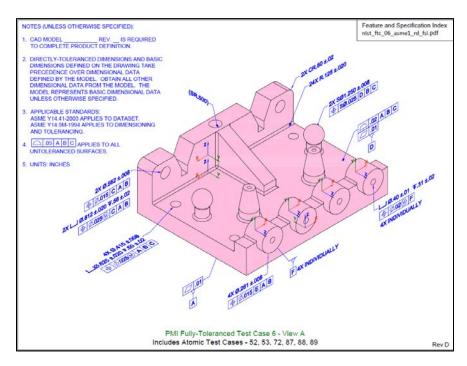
Fully-toleranced test case 6 (FTC 6) drawing
